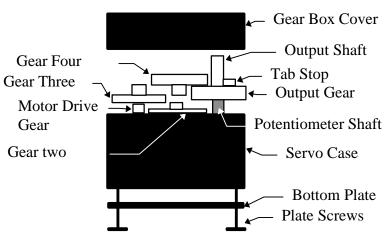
Servo hack: Remove tab stop, remove potentiometer tab inside *Output Gear*, set potentiometer shaft at center setting.
